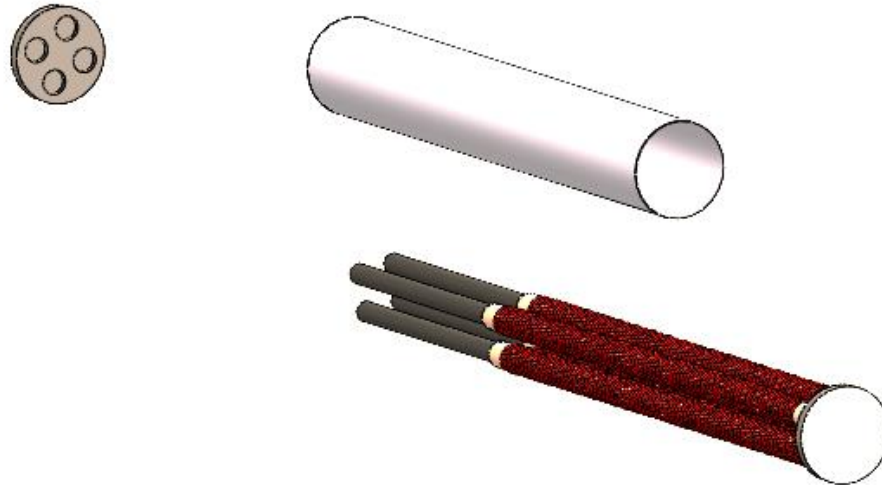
Internal structure of the prototype with exploded view showing the 4 iron bar rods with the copper turns.
